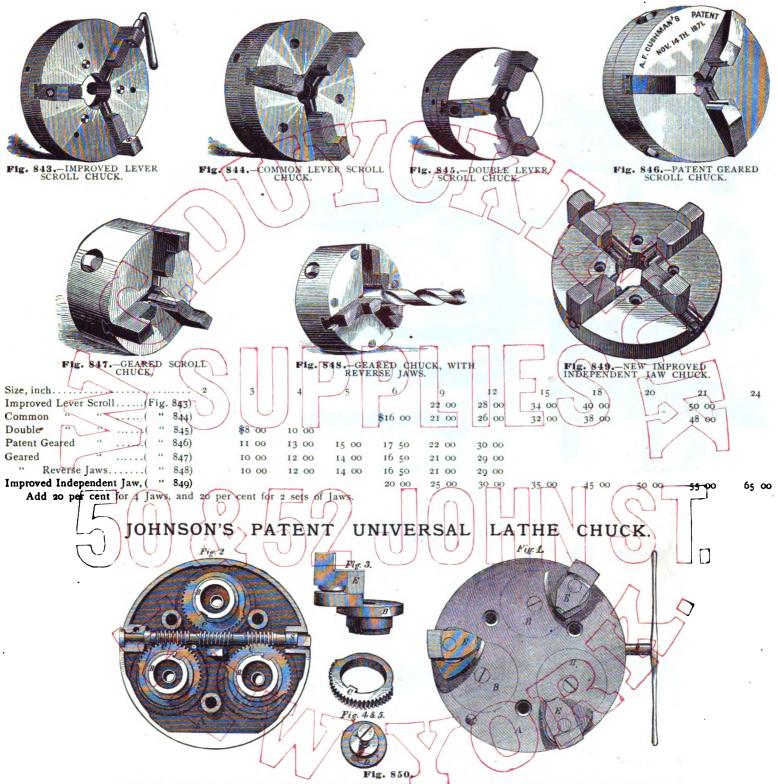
is a face view, and represents the chuck ready for use. Fig. 2 is a section through the edge of the body, parallel with its face, the back part being removed to show the internal arrangement. Figs. 3, 4, and 5 are details of construction readily understood; the jaw E revolves upon a steel pin in the arm of wheel B, to which it is also tongued and grooved, but which, when turned to a certain position, can be removed therefrom at will. The toothed ring C has a solid feather, and is accurately fitted and forced to its seat upon B. The screw and plate D secure B in place. The worm shaft S is of cast steel. The toothed rings C C C and jaws E E E are of hammered iron, and are thoroughly case-hardened. The wrench P is well fitted and hardened. A small screw is inserted in the face of the chuck, to prevent running the wheels out unintentionally. A screw will also be found in the edge of the chuck for the purpose of oiling. It will be noticed that as the wheels revolve, the jaws adjust themselves to the work, and can be reversed or turned in any position at pleasure, and that this chuck is thereby adapted to a great variety of work. It will also hold from the smallest piece to the full size of the chuck, with a pressure that increases with the diameter of the work held, and is unequaled for firmness, durability, and adaptation to the general work of the machine shop.
